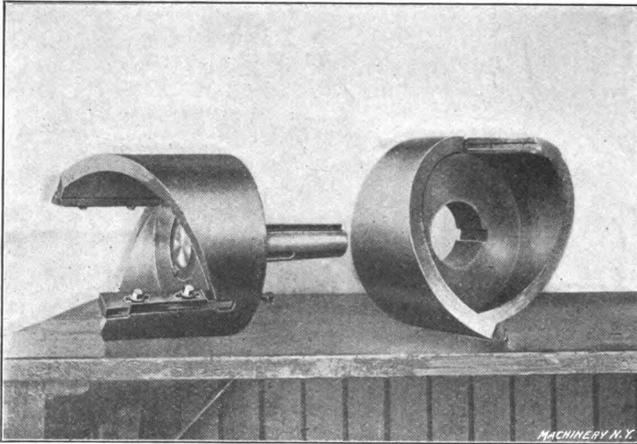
Type of Tools used in the Operation shown in Fig. 26; these tools remove a Solid Core from the Hole
